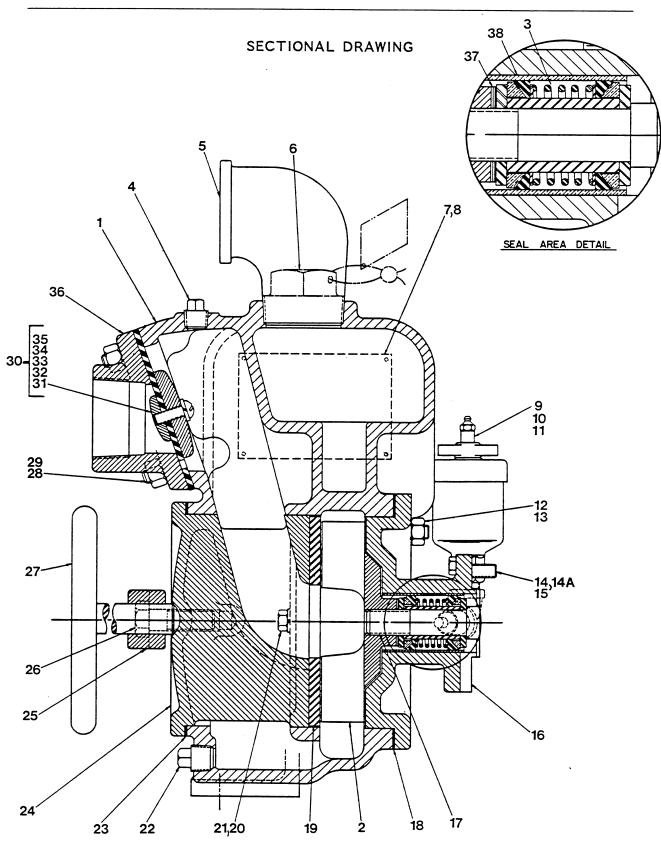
Pump End Assembly 11 1/2A2-(K91P)
